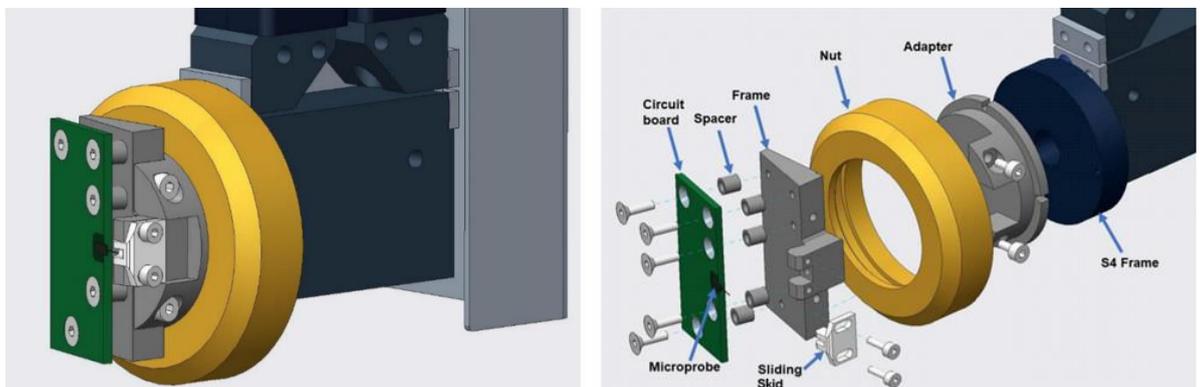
CAD design (left) and exploded view (right) of microprobe integration in a roll measuring instrument.
